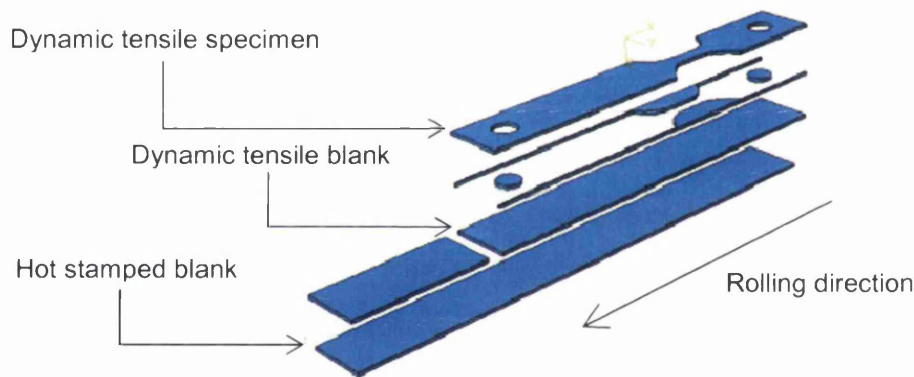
Configuration of dynamic tensile specimen from hot stamped blank
